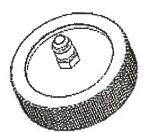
Model PDA-D2 Pneumatic Actuating Adaptor.
